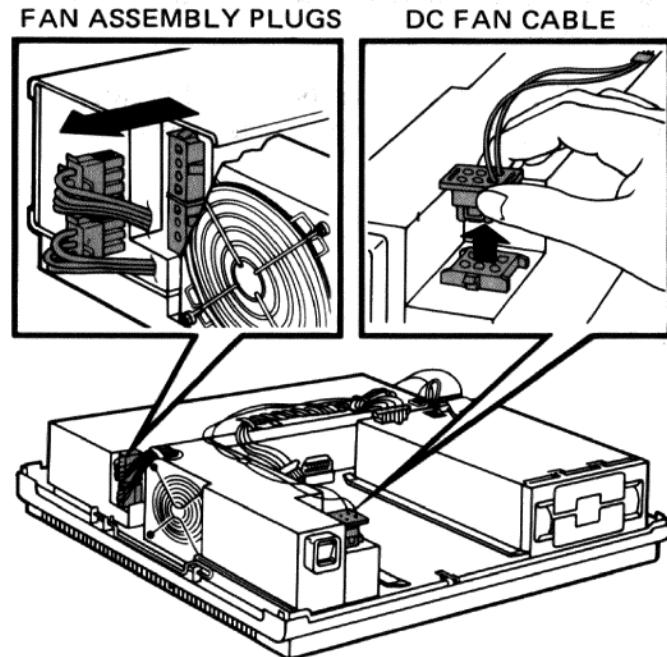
Unplugging Fan Assembly Plugs and DC Fan Cable
